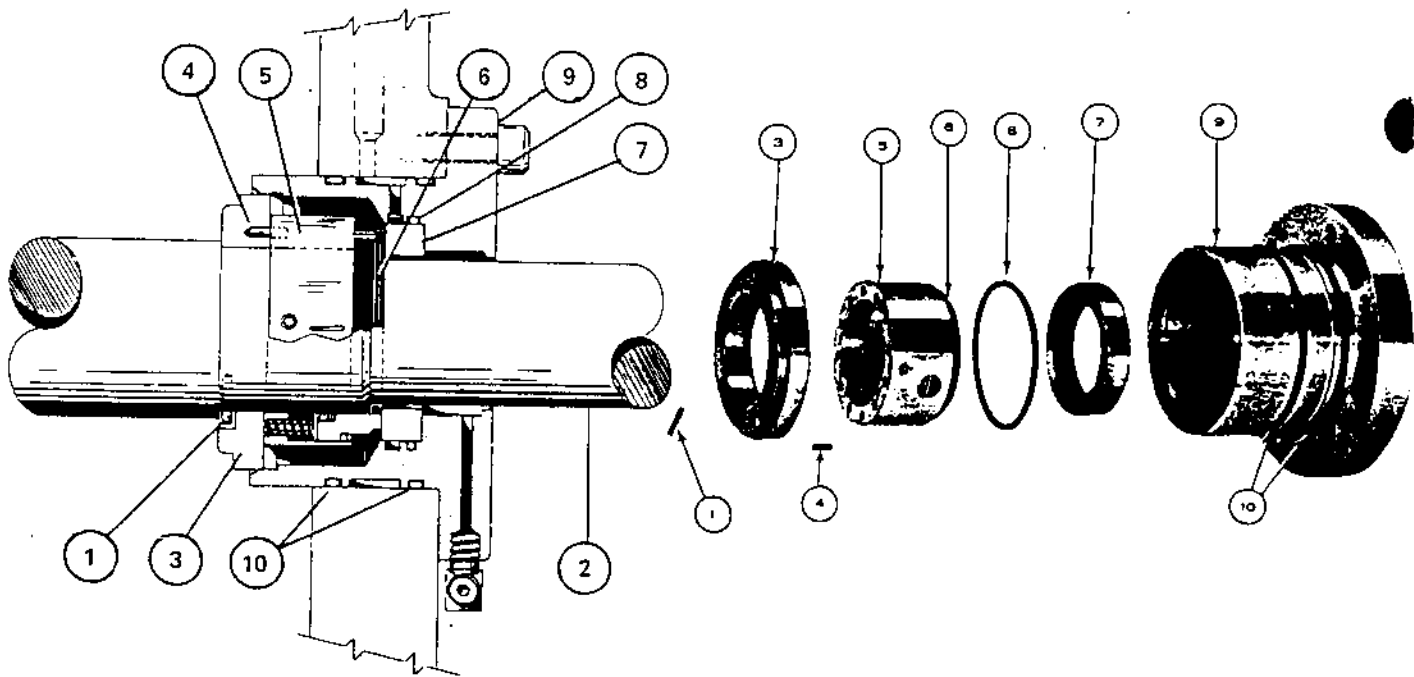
TYPE 8-1 AND 8B1 (LONG SEAL HOUSING)
